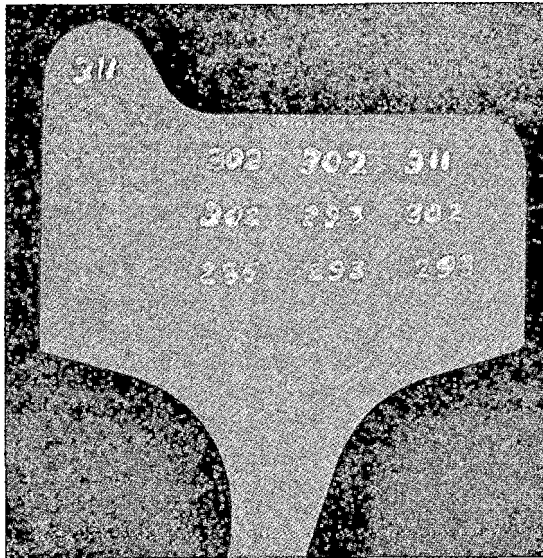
Hardness survey of wheel No. 10793 braked with flanged COBRA brake shoe
